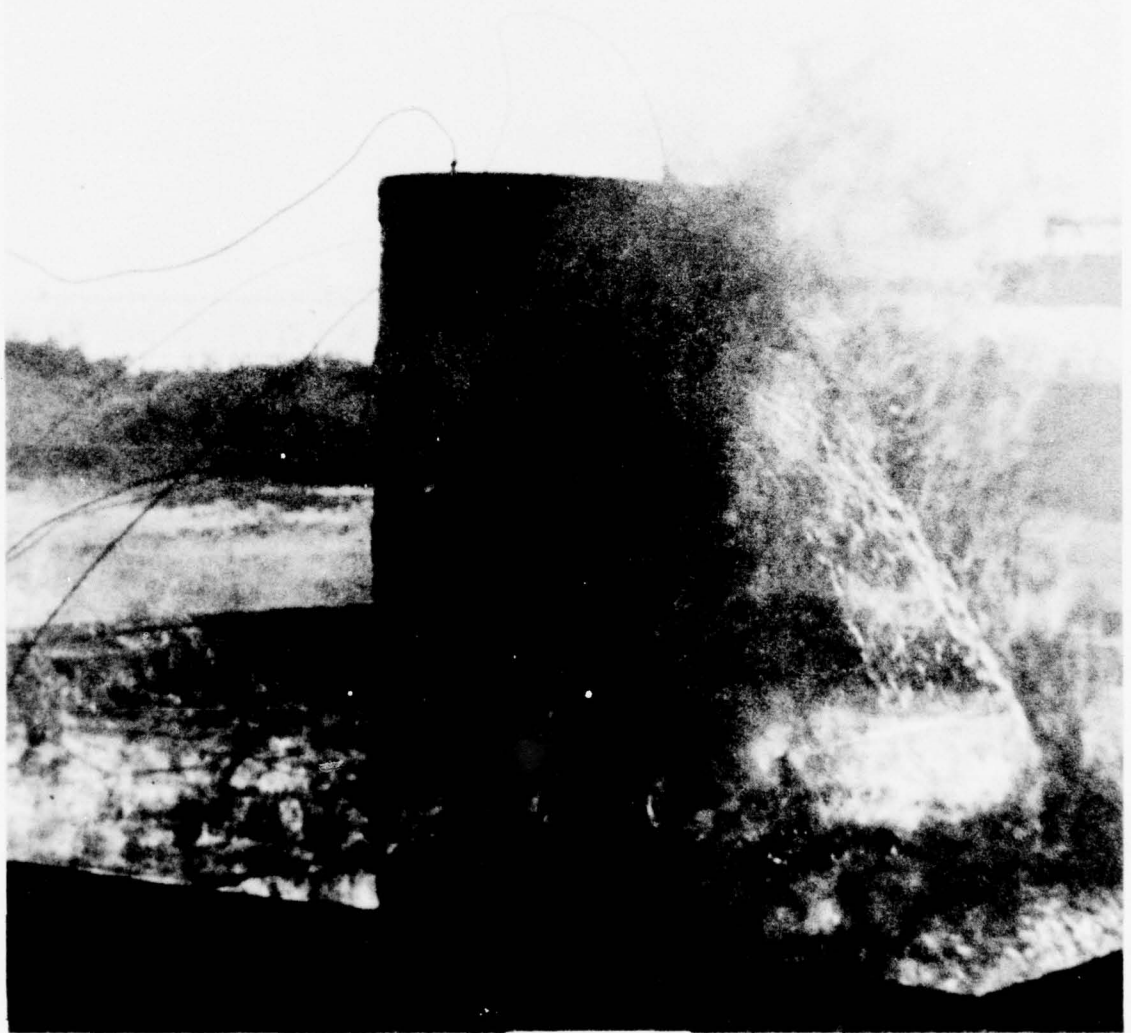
FIFTY-FIVE GALLON ROTATIONALLY MOLDED POLYETHYLENE DRUM JUST AFTER FAILURE
